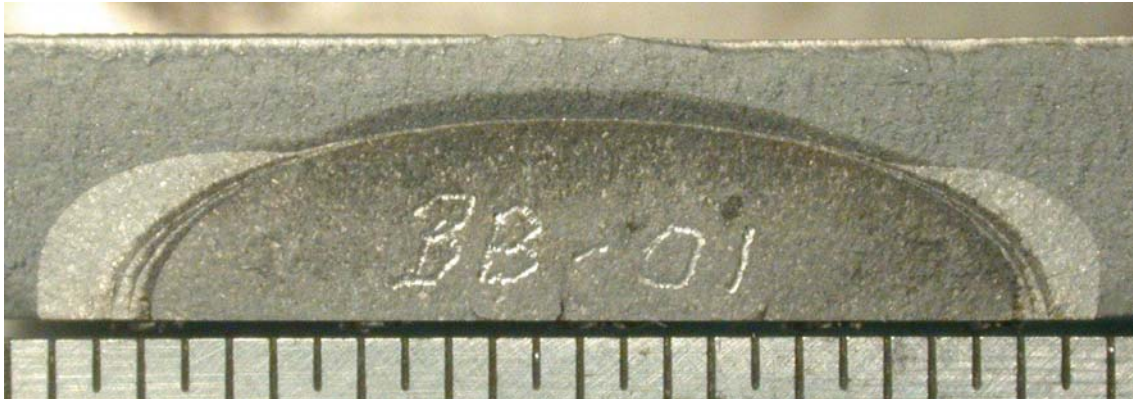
b Typical Surface Crack Fracture Surface (Bending)
